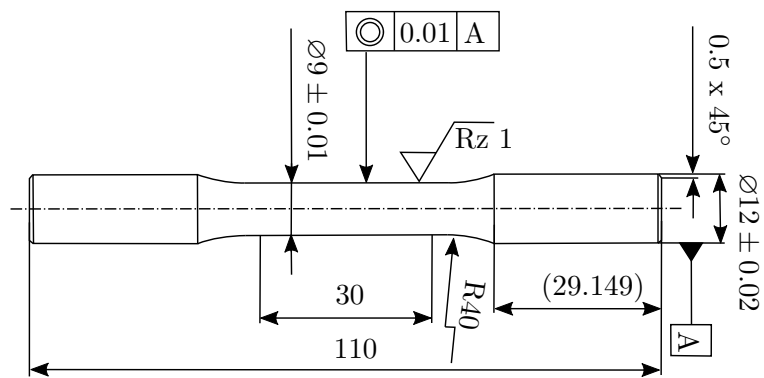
Technical sketch used for the machining of torsion specimen.
